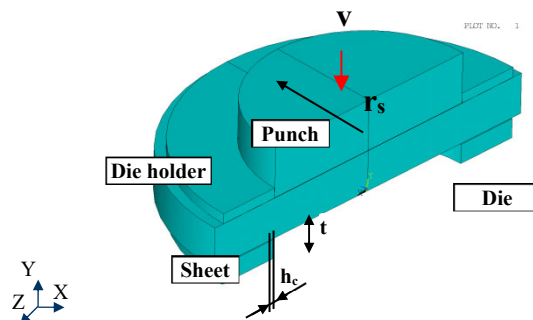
Geometric model of the blanking process: cross-sectional view: r_s – punch radius, h_c – blanking clearance, t – sheet thickness, v – punch speed
